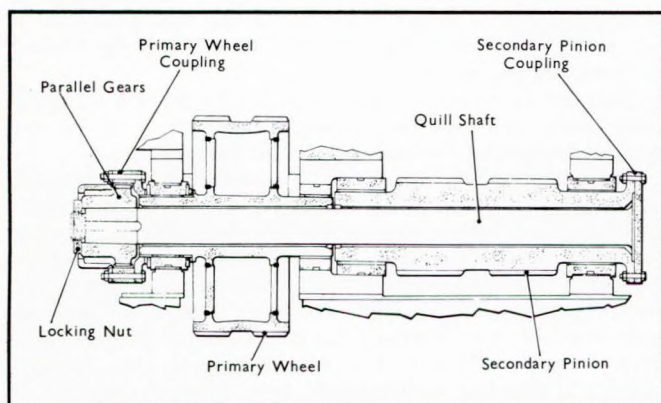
Arrangement of intermediate shaft of a *Type 42* gearbox
